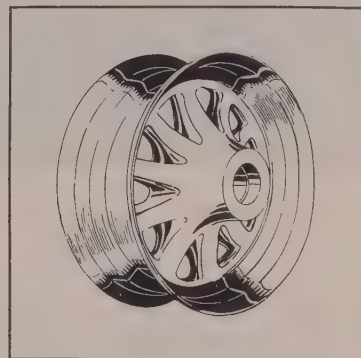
Former construction* had cast steel hub welded to rolled steel rim.
